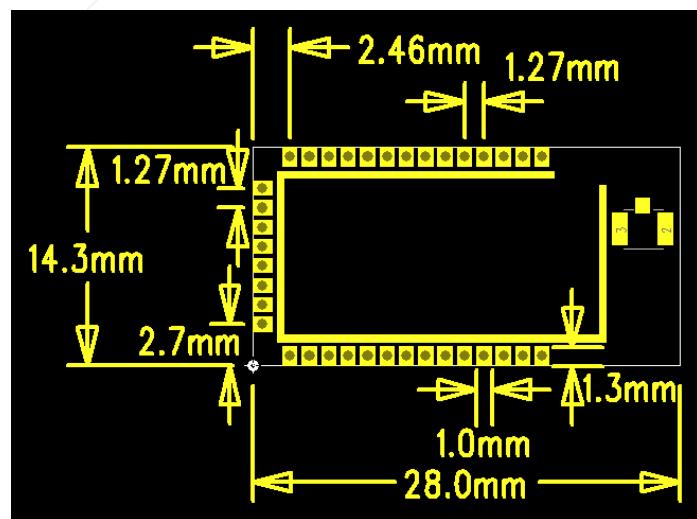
ALXC2XB Detailed Pad Dimensions (Top view)
